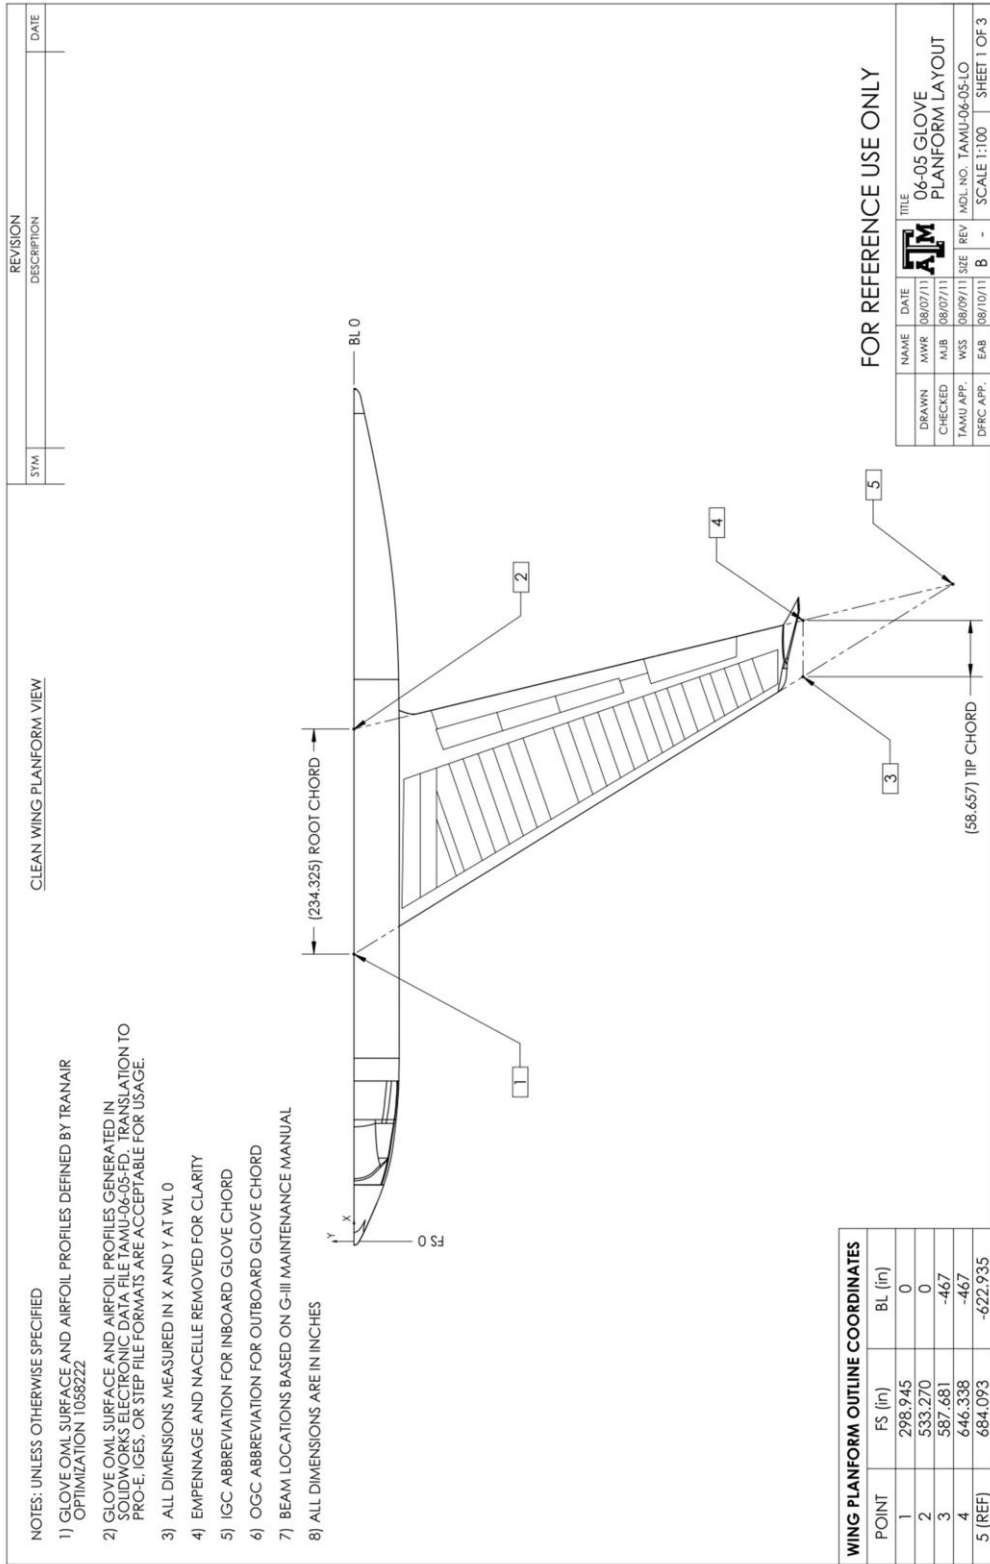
Sheet 1 of the 06-05 Glove Planform Layout drawing: clean wing planform view.
